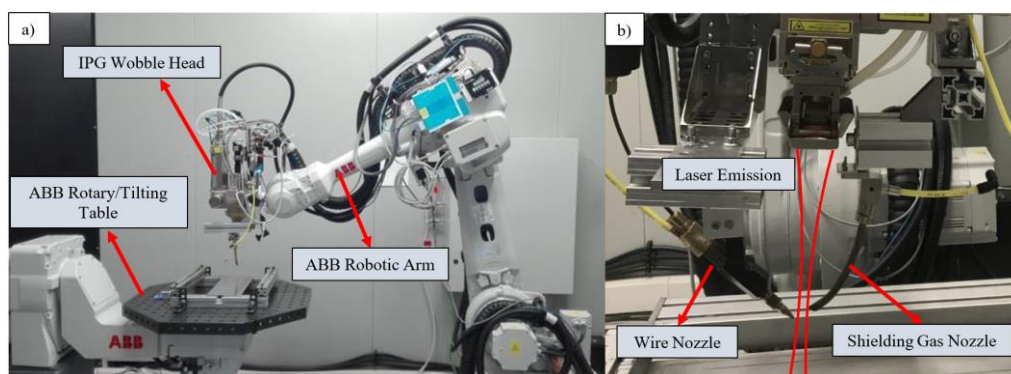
Welding system consists of a) robotic and beam oscillation units, and b) wire feeding and shielding.
